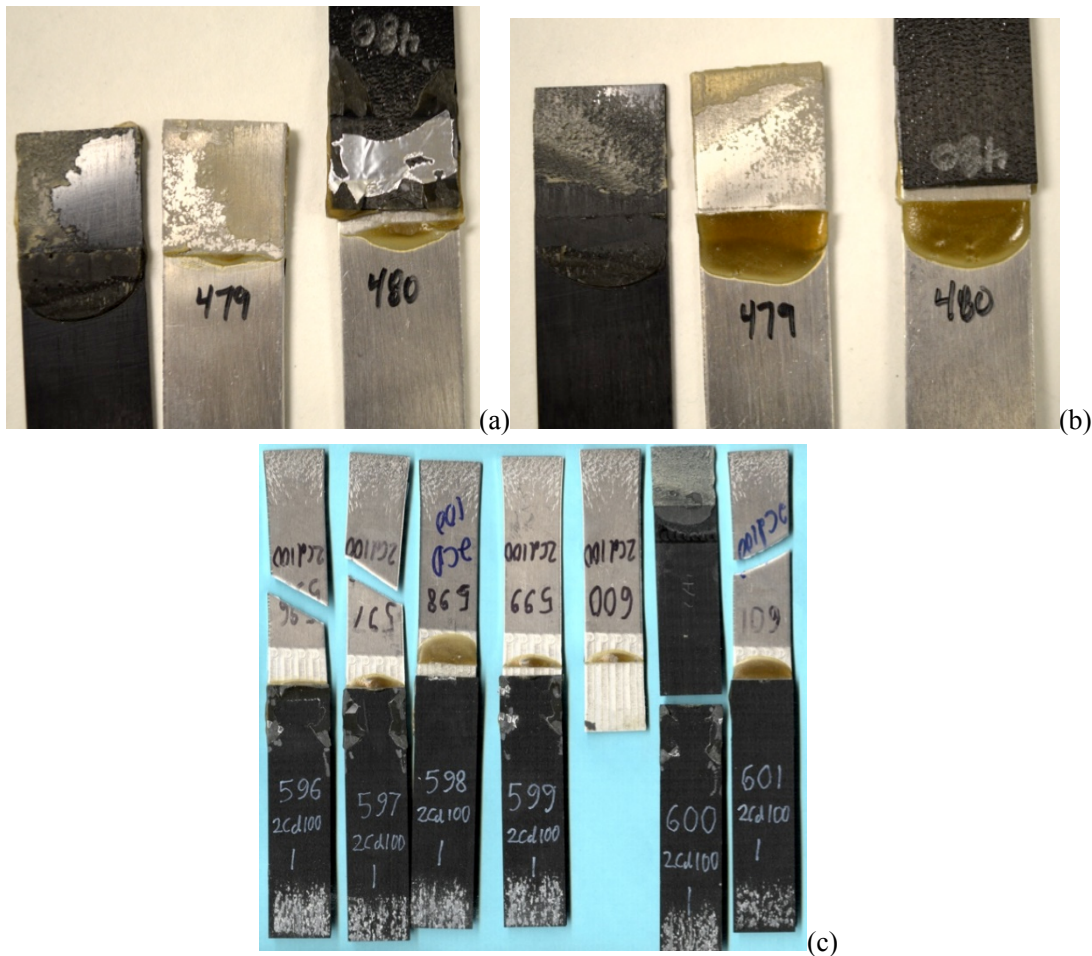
Pictures taken after mechanical testing of double-lap joints bonded with adhesive DP810 showing fracture surfaces and/or failure modes at (a, b) baseline joints and (c) joints with laser-structured surfaces using a laser beam size of 6 mm.
